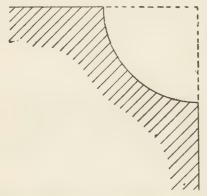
Old-fashioned Hollow Edge of Castings.
